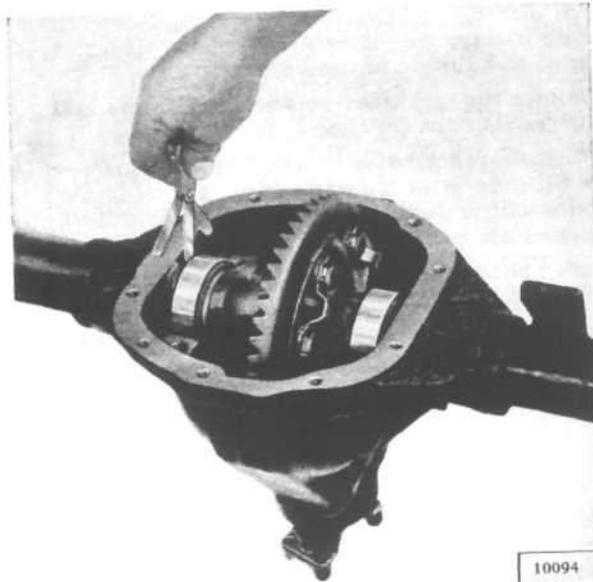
CHECKING DIFFERENTIAL BEARINGS
